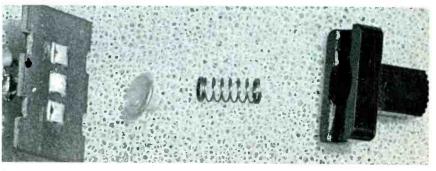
Do not allow spring to fly out when straightening metal fingers.
